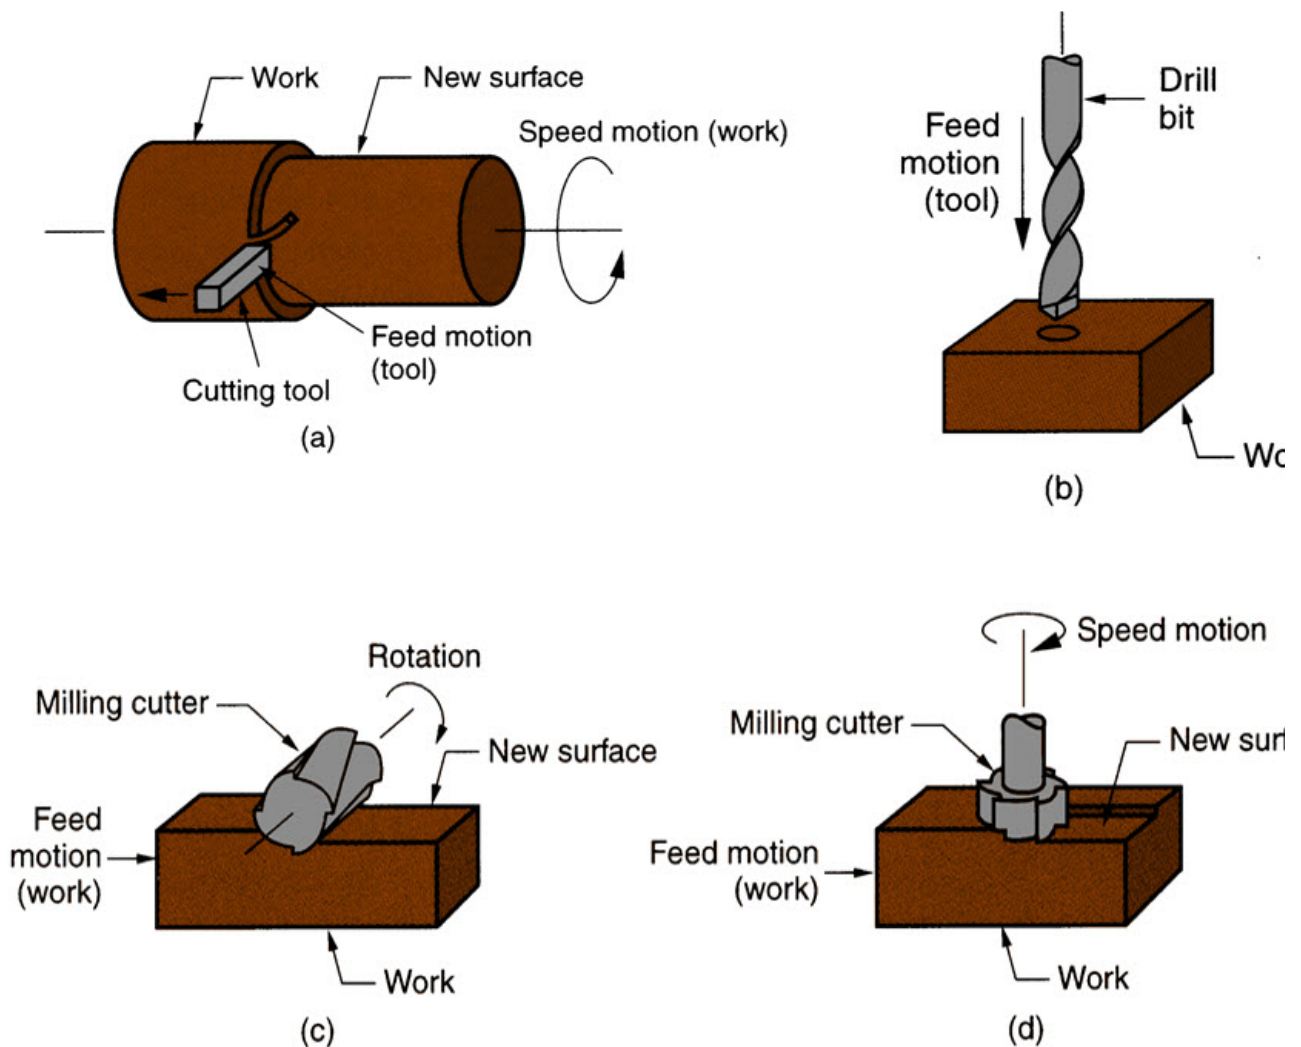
The three most common types of machining processes: (a) turning, (b) drilling, and two forms of milling: (c) peripheral milling, and (d) face milling.
